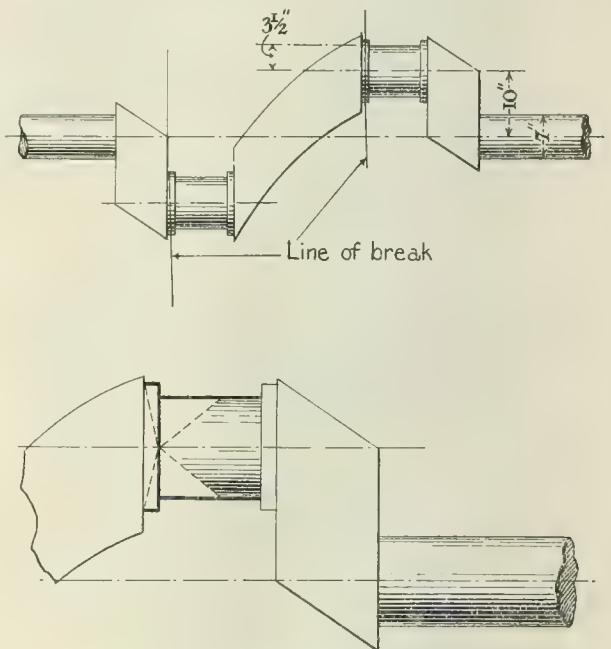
Cast-steel Crankshaft Broken off between the Web, repaired by the Electric-arc Welding Process.
